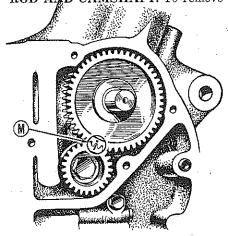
The timing marks (M) on camshaft gear and crankshaft gear should be aligned as shown.
